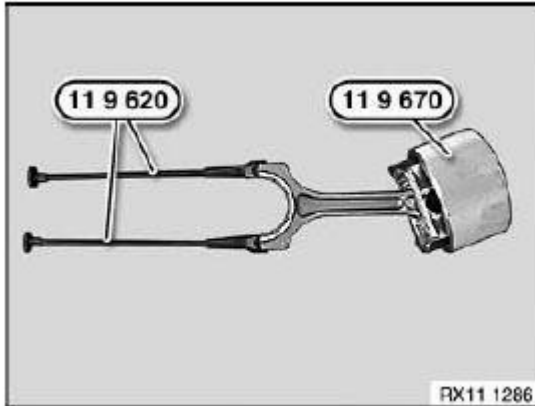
Identifying Special Tool 11 9 620 And 11 9 670
